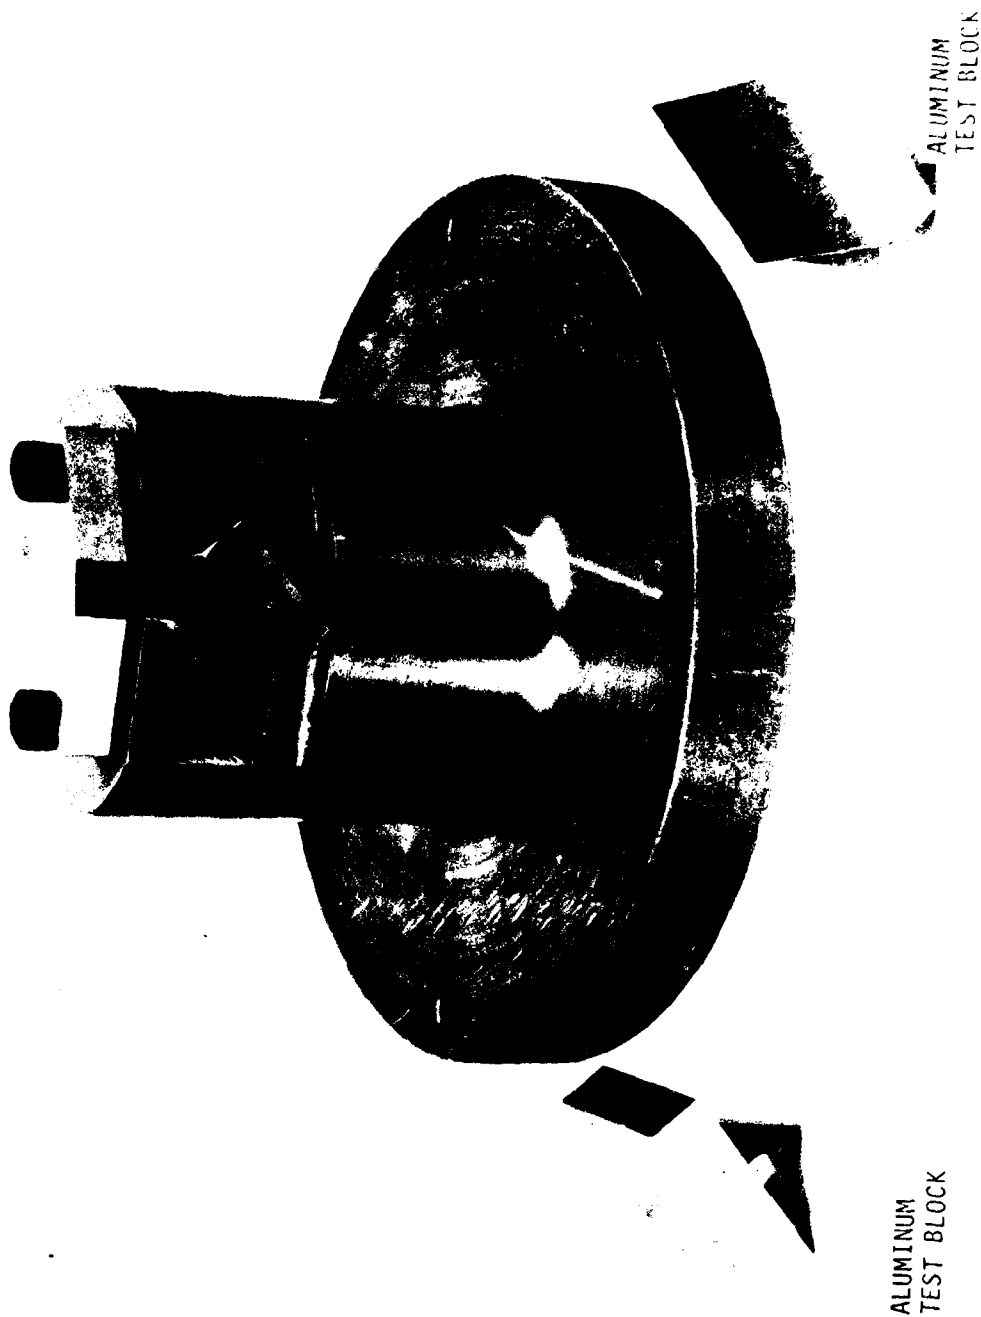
Holding Fixture with AN66 Test Block Mounted.
